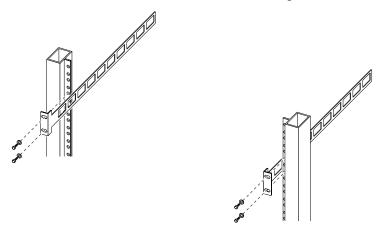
Attaching Rear Mounting Brackets—Cabinet Installation
